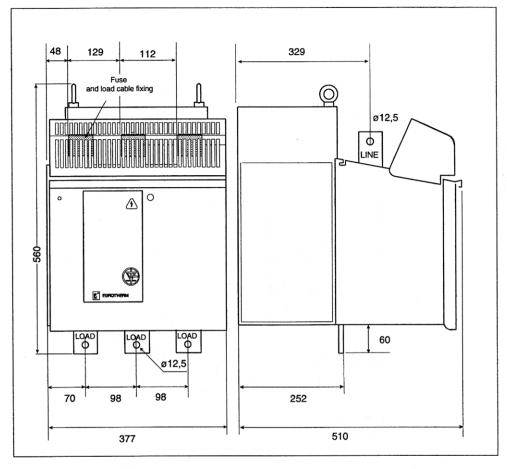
Overall dimensions (mm) of the TC3001 / 700A-1000 A nominal series thyristor units and power connection details
